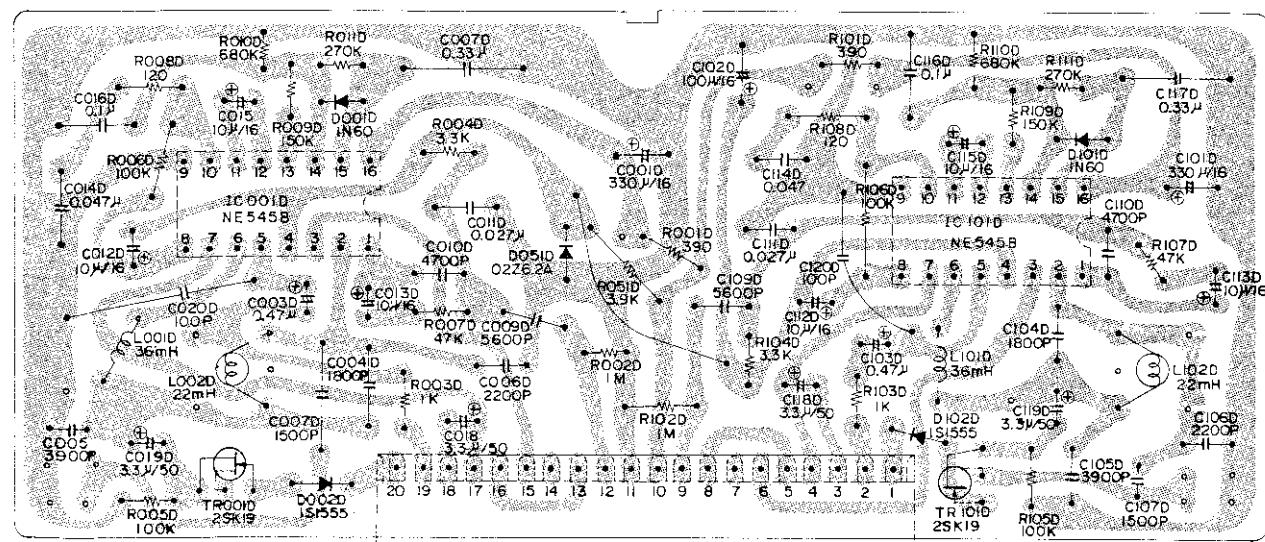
Bottom View of Dolby P.C. Board, PC-012
